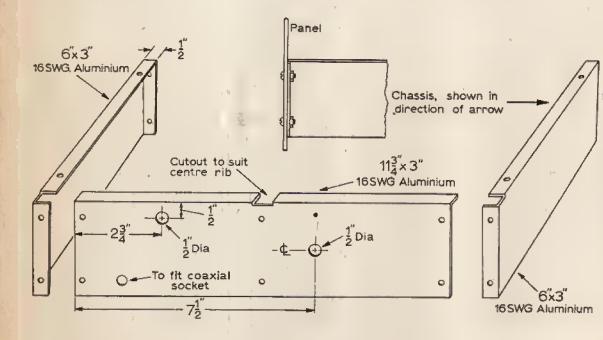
Exploded view of chassis members. Note that panel extends below the bottom of the chassis, see Fig. 6. Part One. Since the rear member carries only the coaxial socket it can be left off until all wiring and constructional work is completed.
